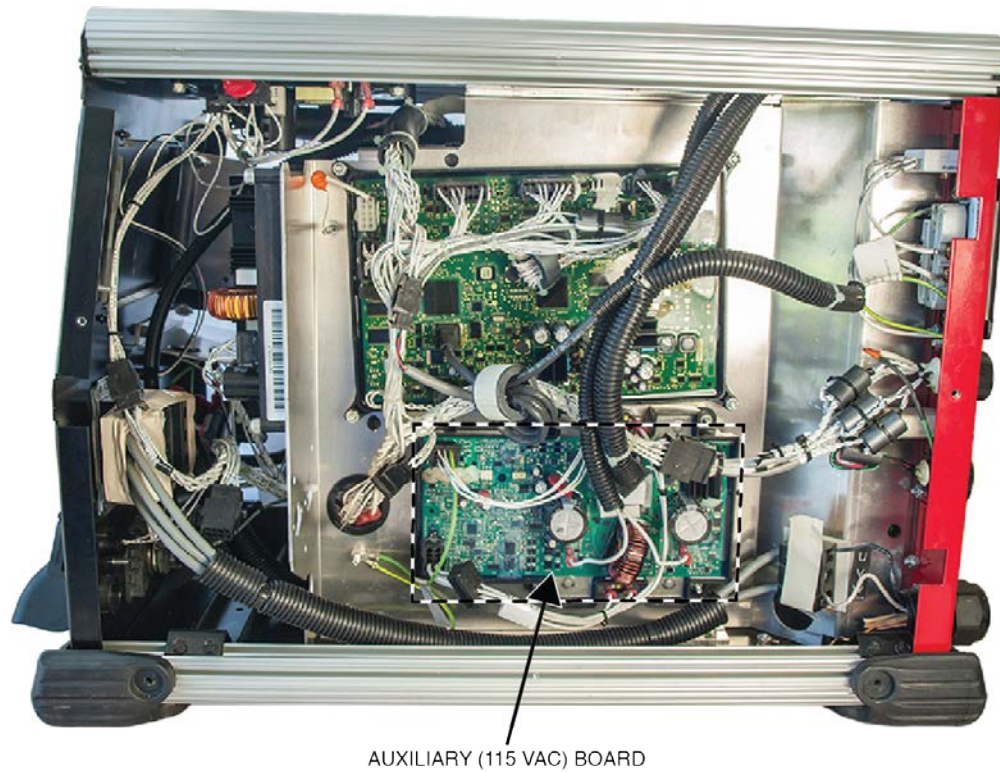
Auxiliary (115 VAC) Board plug and LED locations
